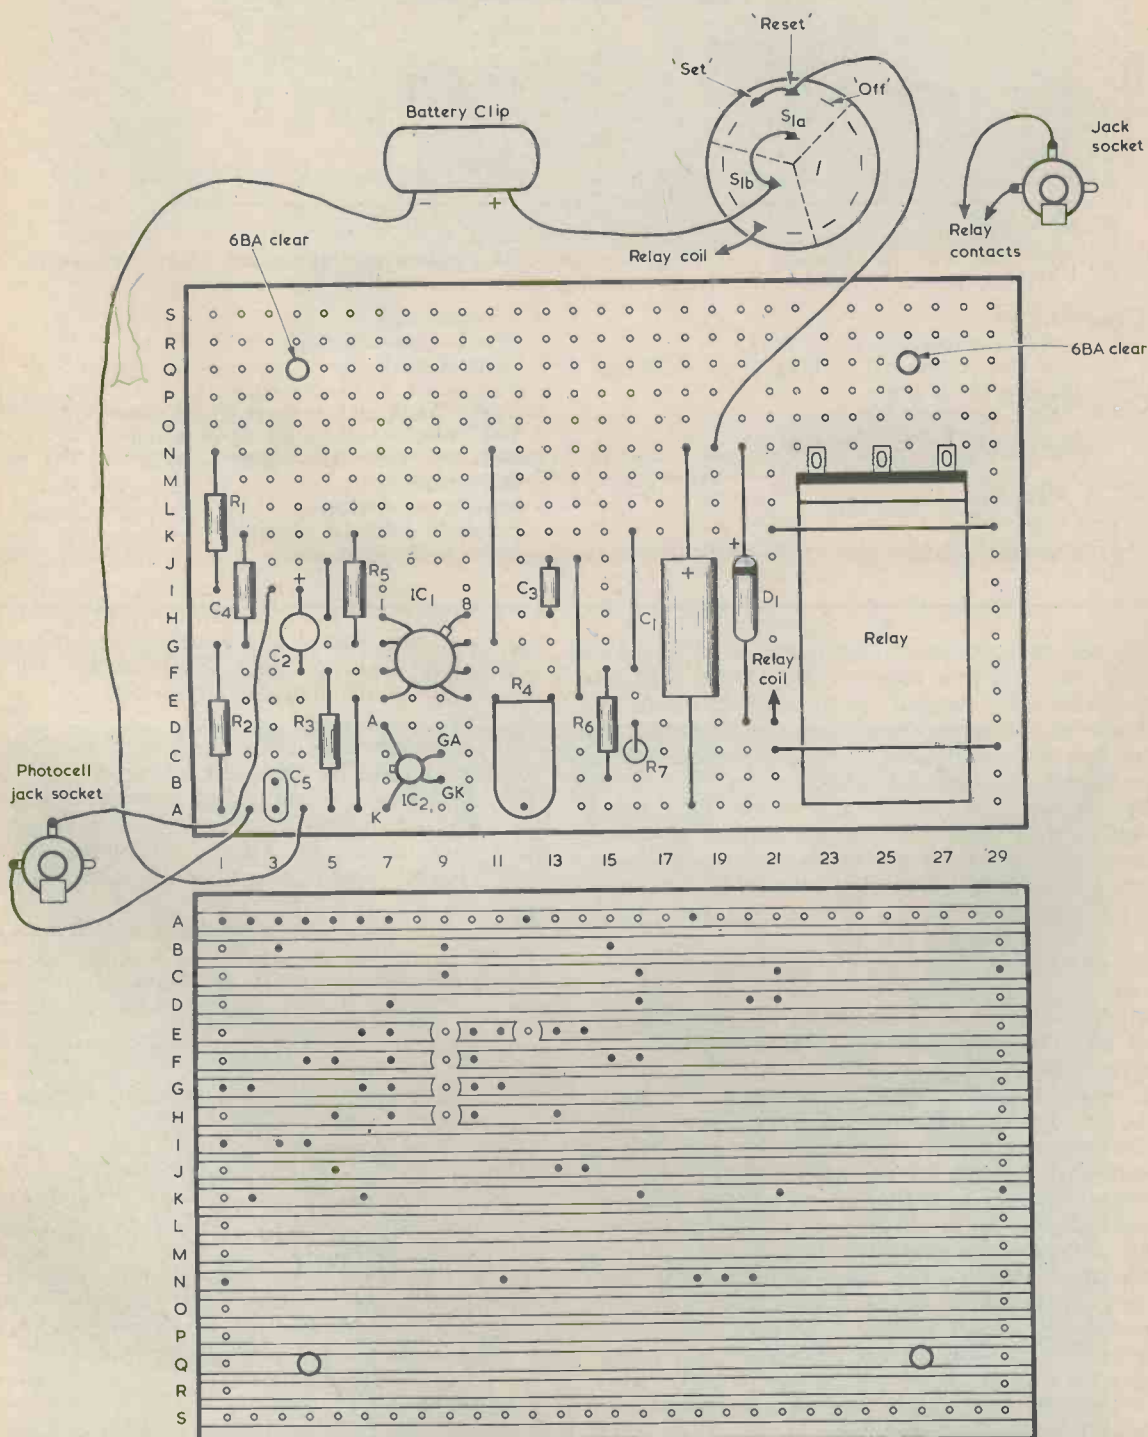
Details of the component assembly on the Vero stripboard. The relay is held in position by two tinned copper wires soldered to the strips at the points indicated
